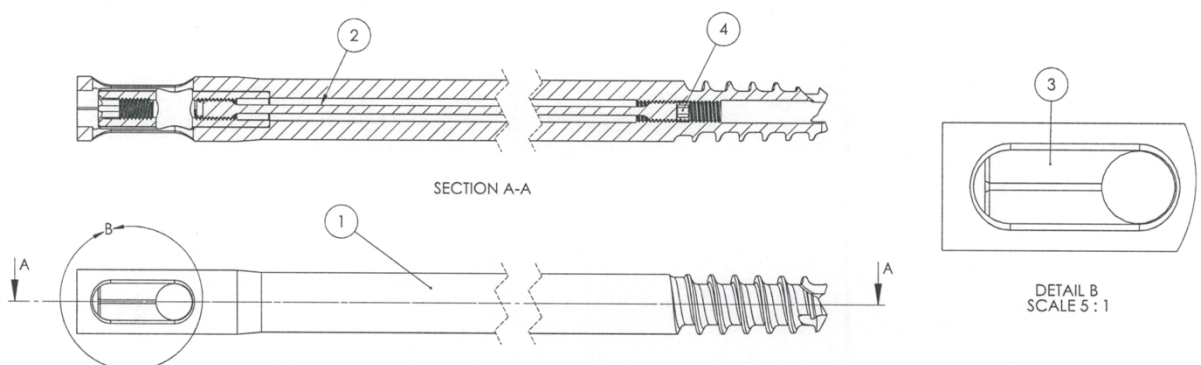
Manufacturing schematic for assembly of internal components of dynamic prototype device.
